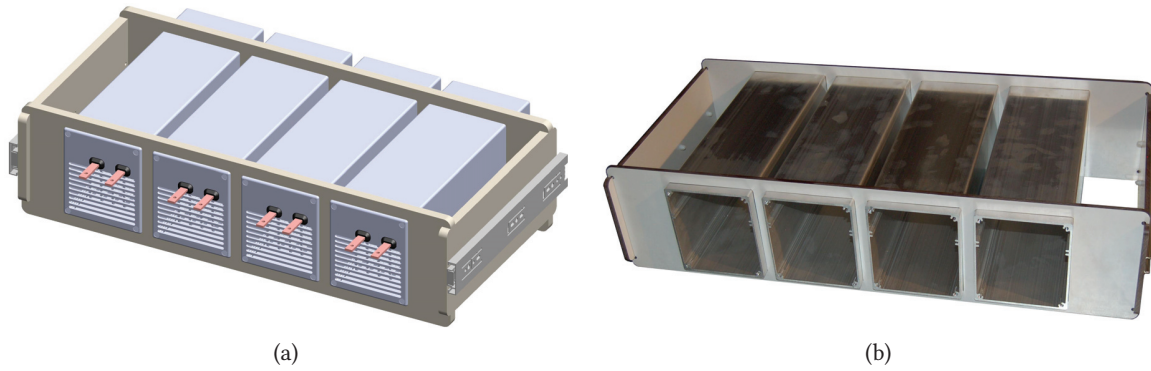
Drawer sub-assembly containing four cells: (a) CAD drawing and (b) realization.
